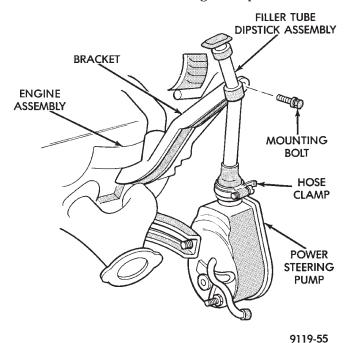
Power Steering Pump Filler Tube/Dipstick
